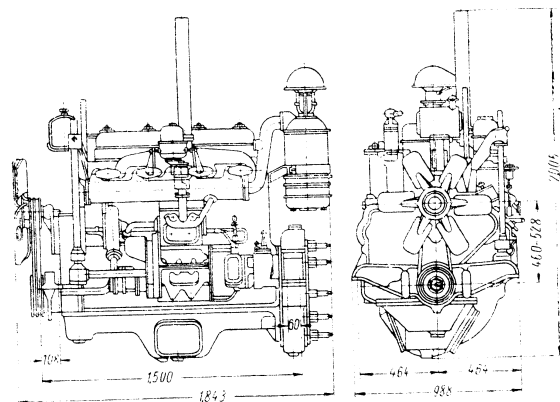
KJM-46 Diesel Engine Overall Dimensions (mm).
